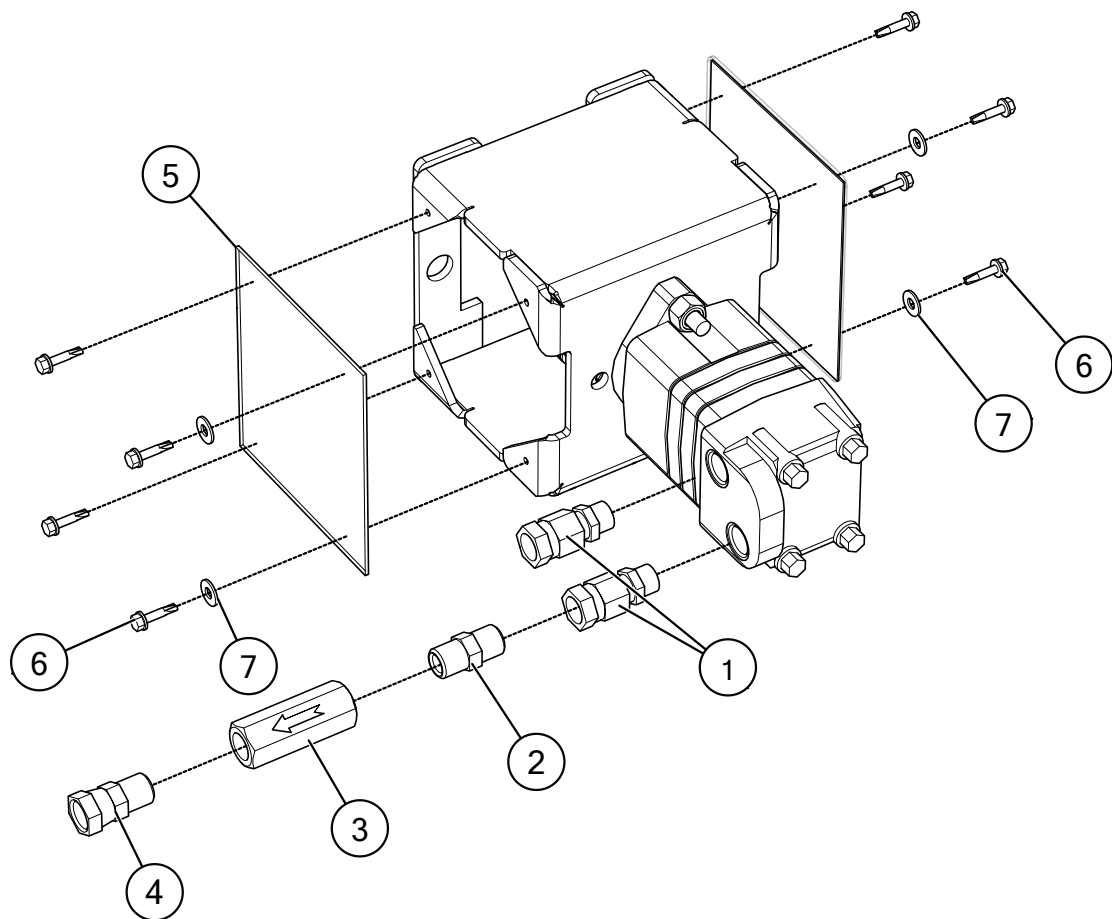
Installing the Hydraulic MotorInstall the Hydraulic Fittings and Coupler Guard
